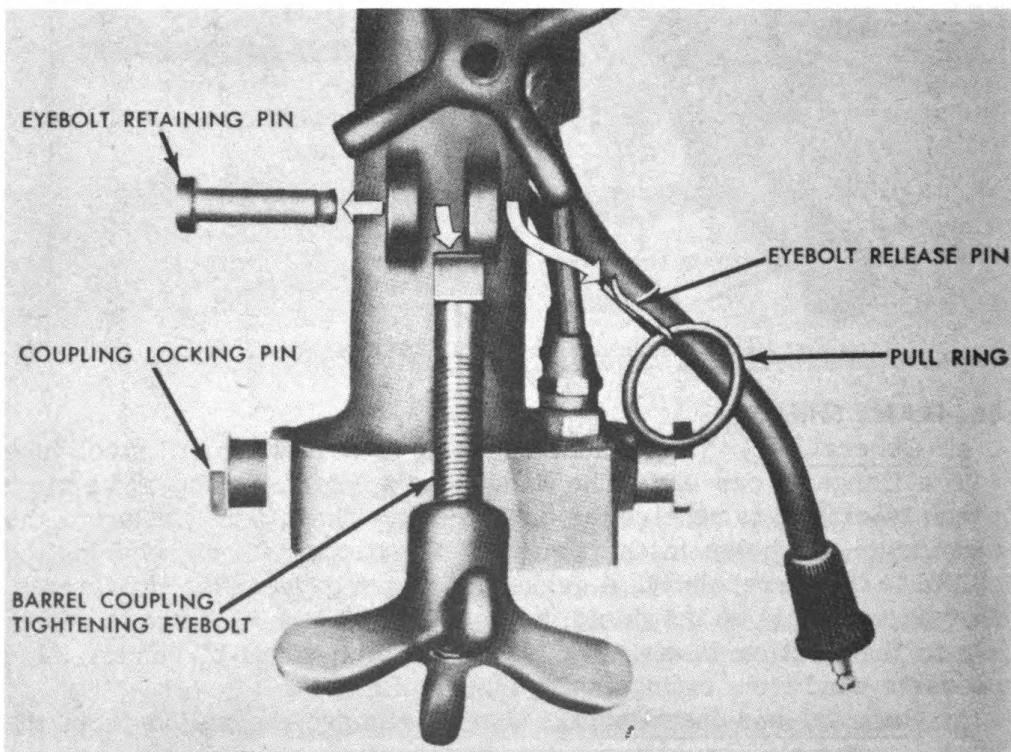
Exploded view of barrel coupling tightening eyebolt assembly.
